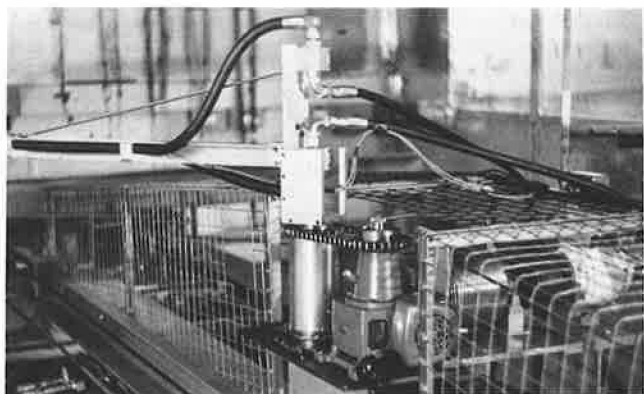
Swinging arm driven by gearbox coupled to grooved drum.
